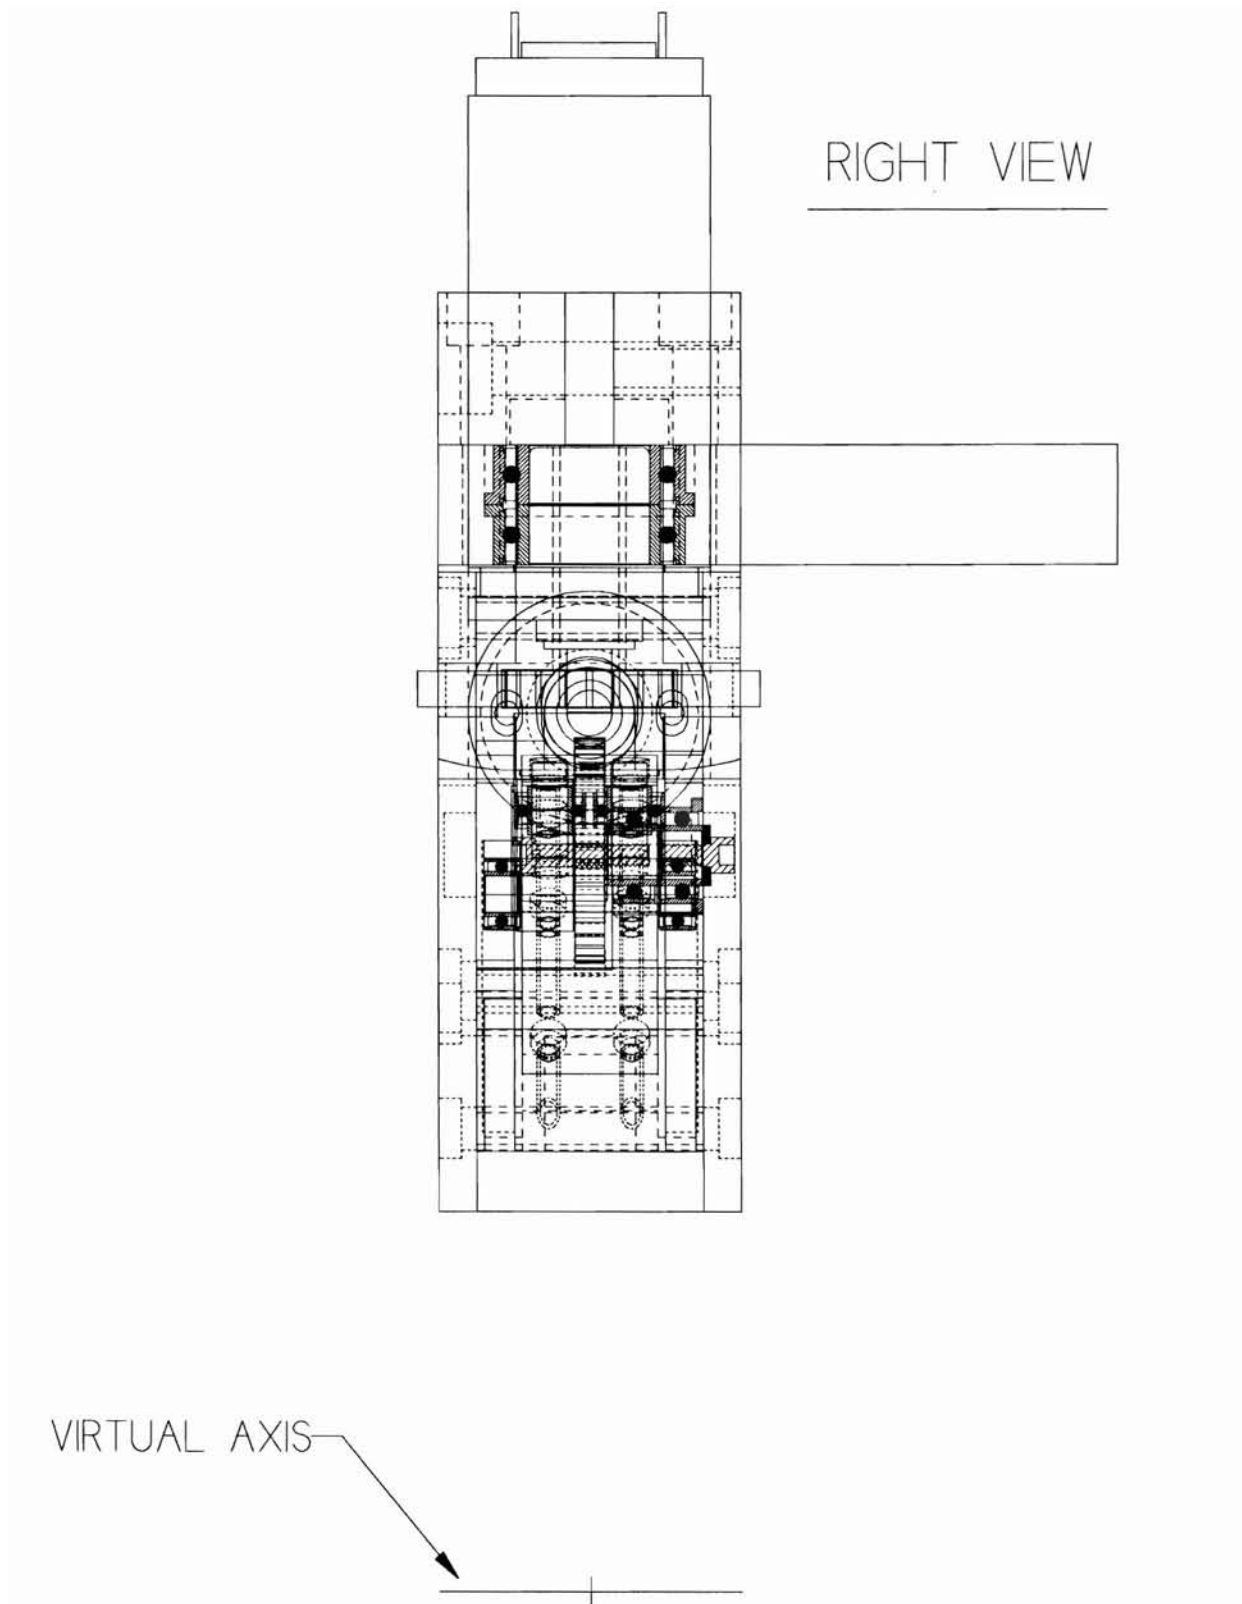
Right view enlargement (2X) of thumb joint design for Phase-II glove controller mechanism. (Dwg. GLOVE005.GCD)
